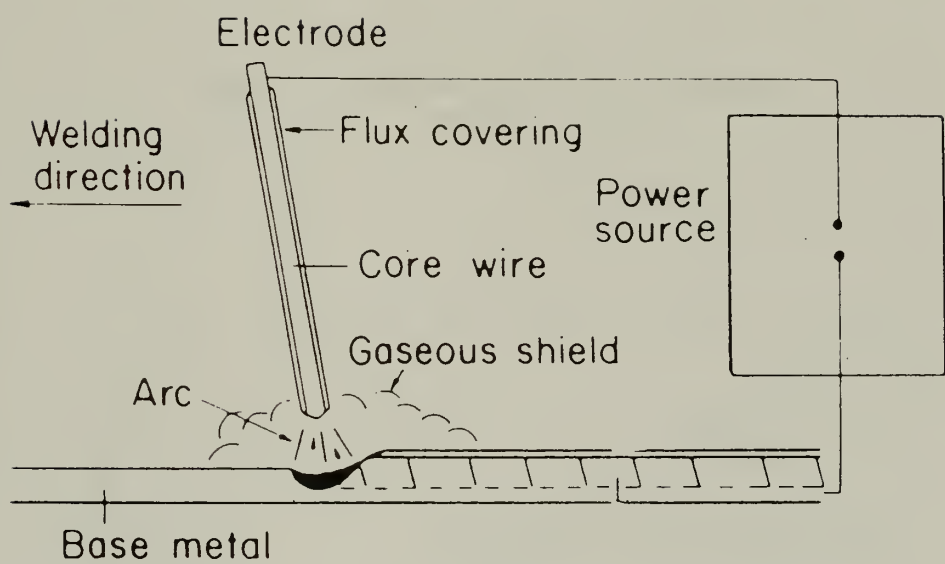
Shielded Metal Arc Welding Process
